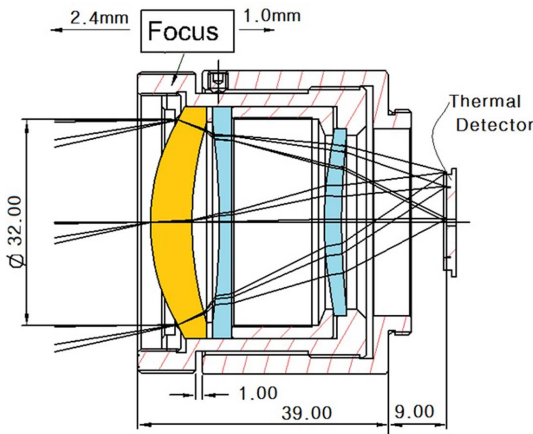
Sectional view of the barrel containing the optimized MWIR imaging optical system with 35 mm focal length.
